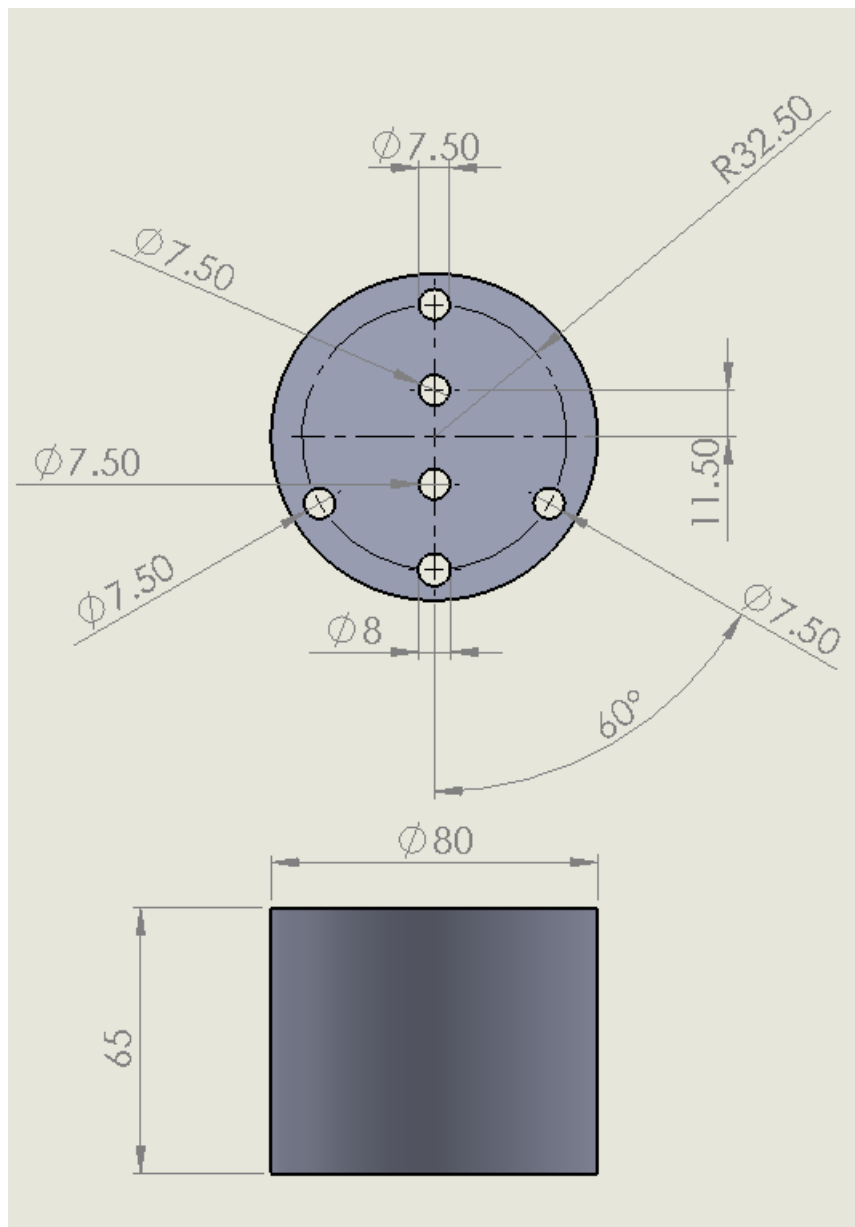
Dimensioned drawing of the top cylindrical radiation shield.
